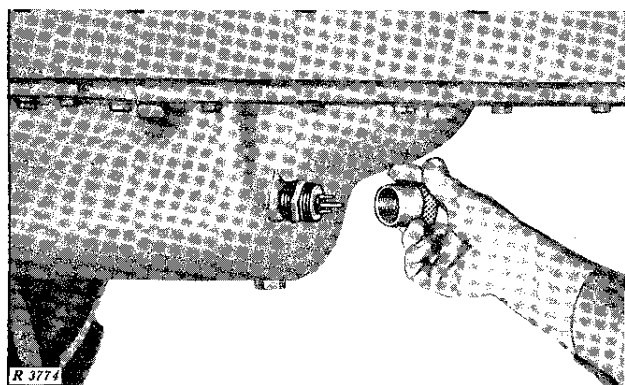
Removing Cap from Crankcase Oil Heater
